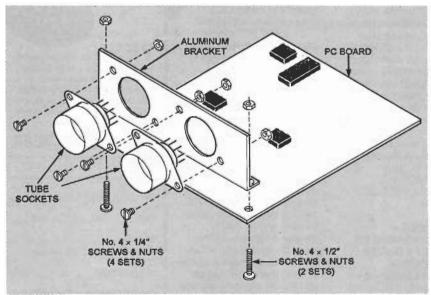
THE TUBES ARE MOUNTED HORIZONTALLY to fit in a low-profile case. Four No. 4 \times ½ inch machine screws and nuts fasten the tube sockets to their mounting bracket. The right-angled aluminum bracket is fastened to the circuit board with four No. 4 \times ½-inch screws and nuts that also hold the assembly in the case.
